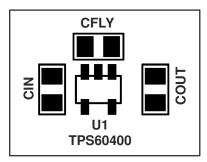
Recommended PCB Layout for TPS6040x (Top Layer)
